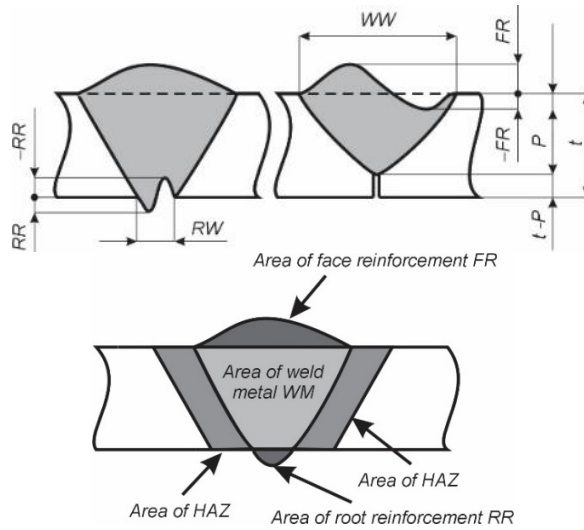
Weld geometry; a) dimensions; b) surfaces
